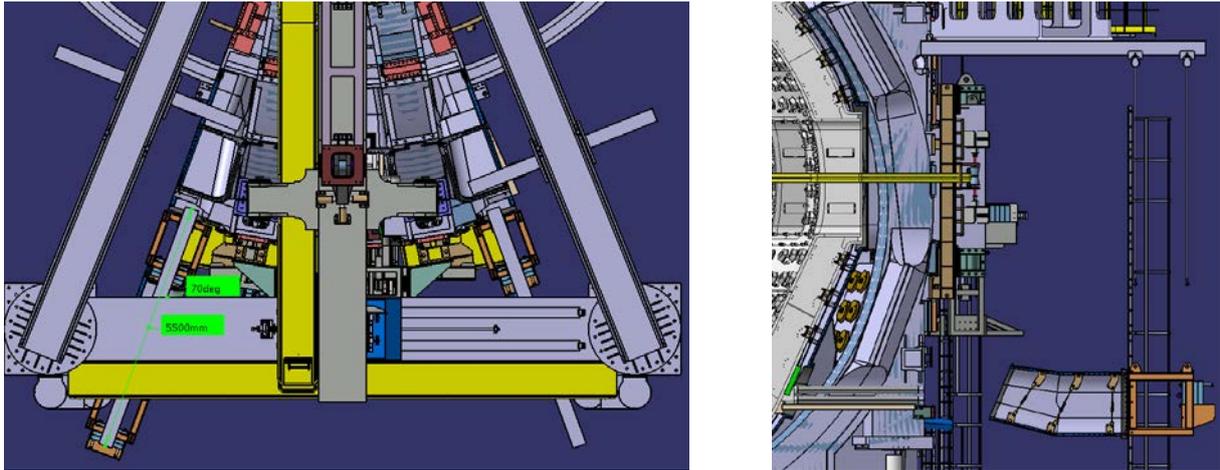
Illustration of a lifting beam implemented on an existing sub-assembly tool
